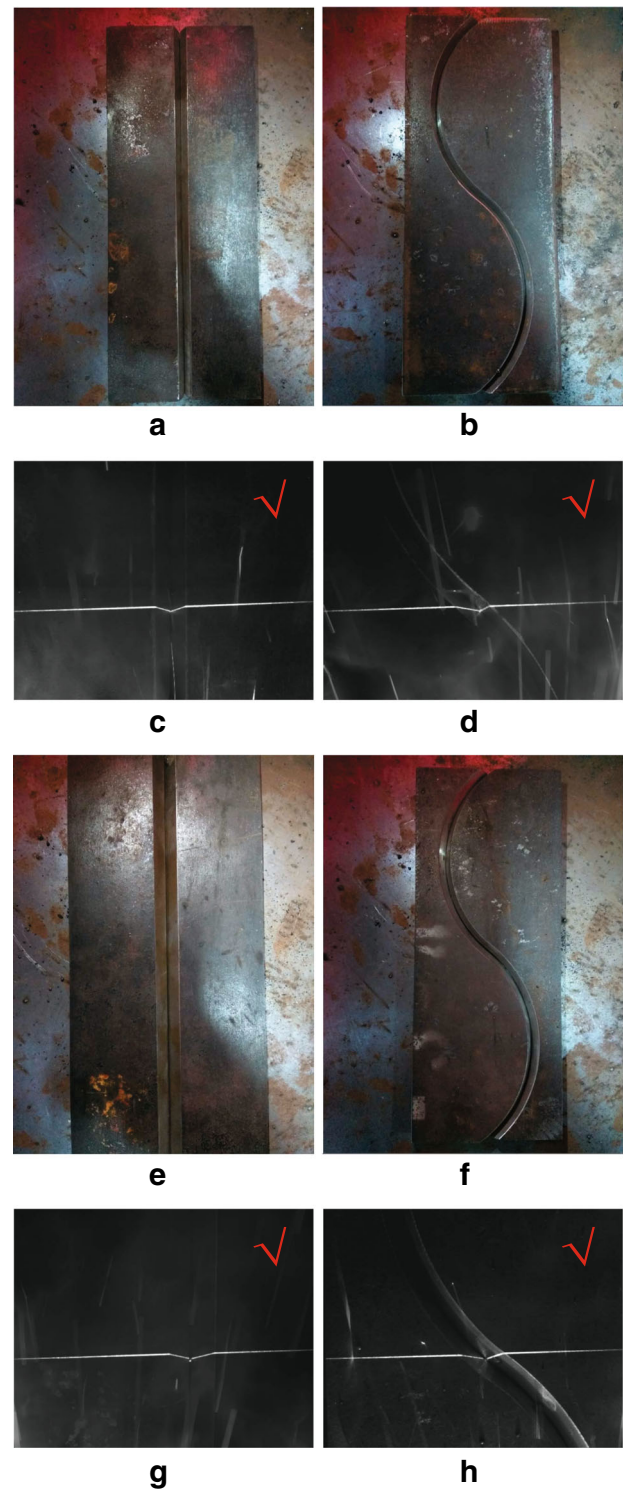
Some testing samples of symmetric V groove. a The straight welding seam with small size of groove. b The curved welding seam with small size of groove. c The structured-light image of the straight welding seam with small size of groove. d The structured-light image of the curved welding seam with small size of groove. e The straight welding seam with big size of groove. f The curved welding seam with big size of groove. g The structured-light image of the straight welding seam with big size of groove. h The structured-light image of the curved welding seam with big size of groove
